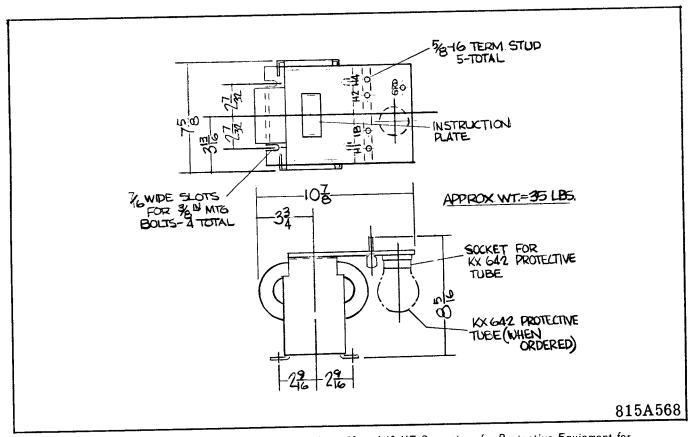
Insulating Transformer Outlines for Protection Equipment for HCB and HCB-1 Relaying.
